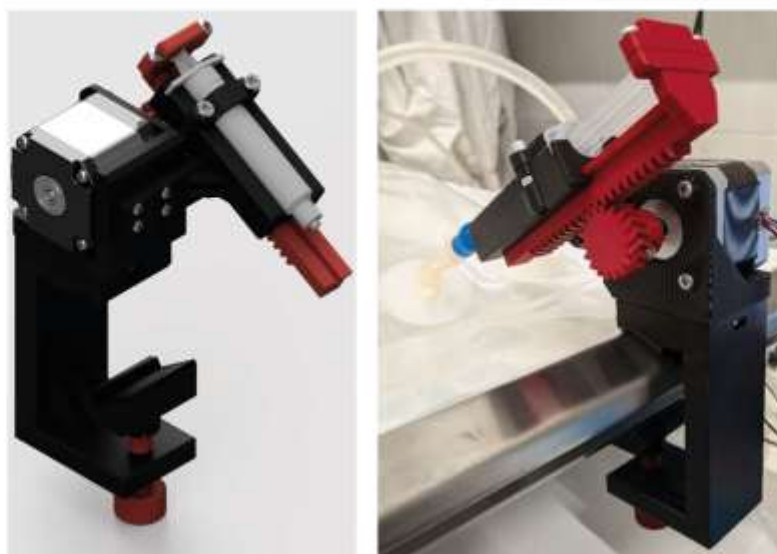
3D rendering of the syringe holder equipped with a 2 mL syringe. Left: isometric view of the holder with the visible stepper motor. Right: 3D printed dosing device mounted to the bioreactor rocking tray with the rack-and-pinion mechanism.
